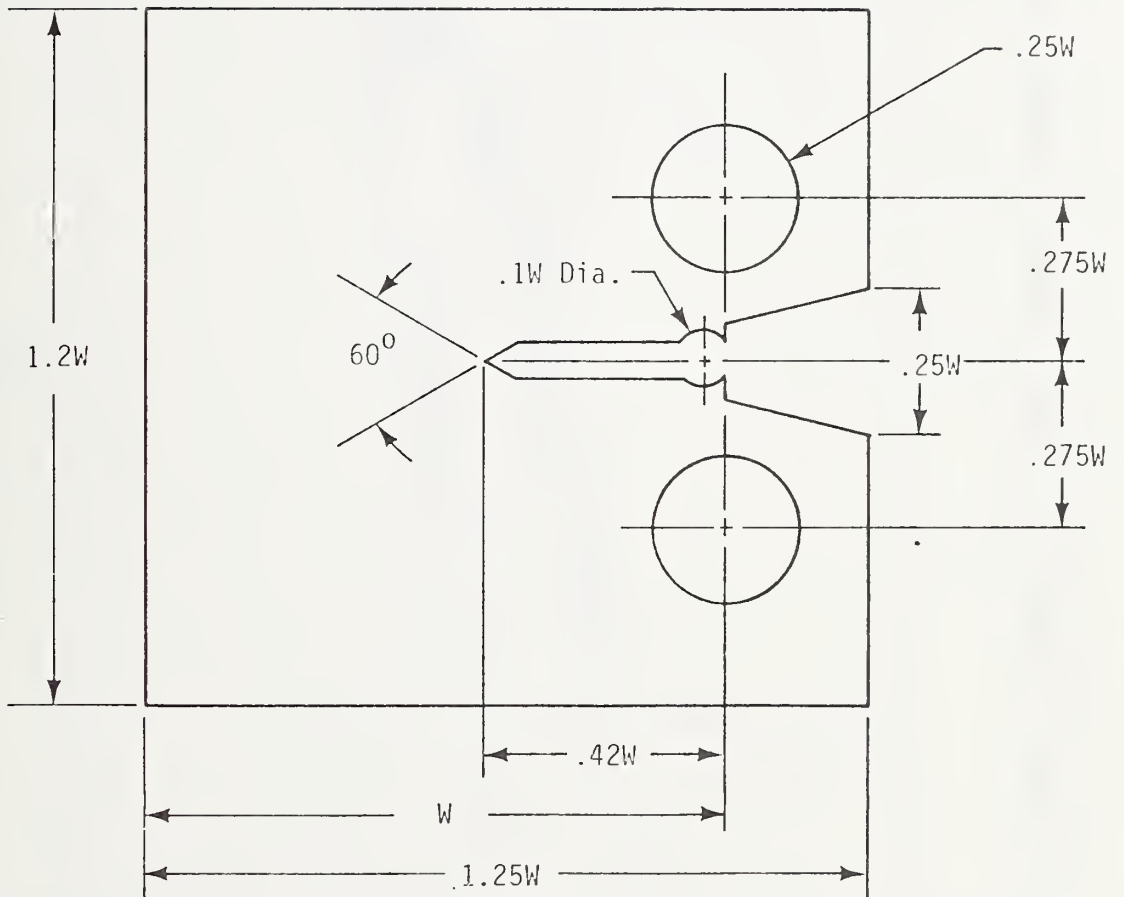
Compact specimen used in fatigue and fracture tests (thickness,  $B = 3.17$  cm; dimensions are in cm).
